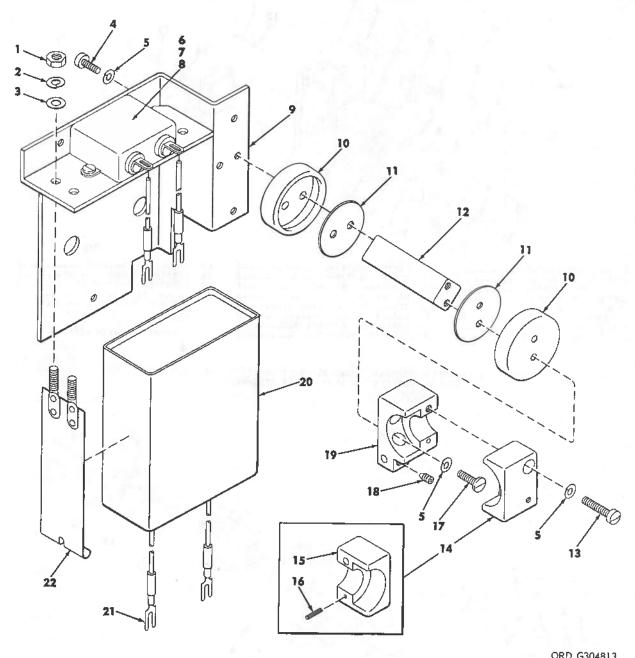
COUPLER, ELECTRON TUBE /8172417/-EXPLODED VIEW /SEE FIGURE 119 FOR NEXT HIGHER ASSEMBLY/
